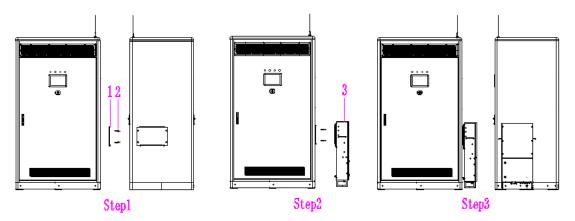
Illustration of ATS wall-mounted equipment installation
